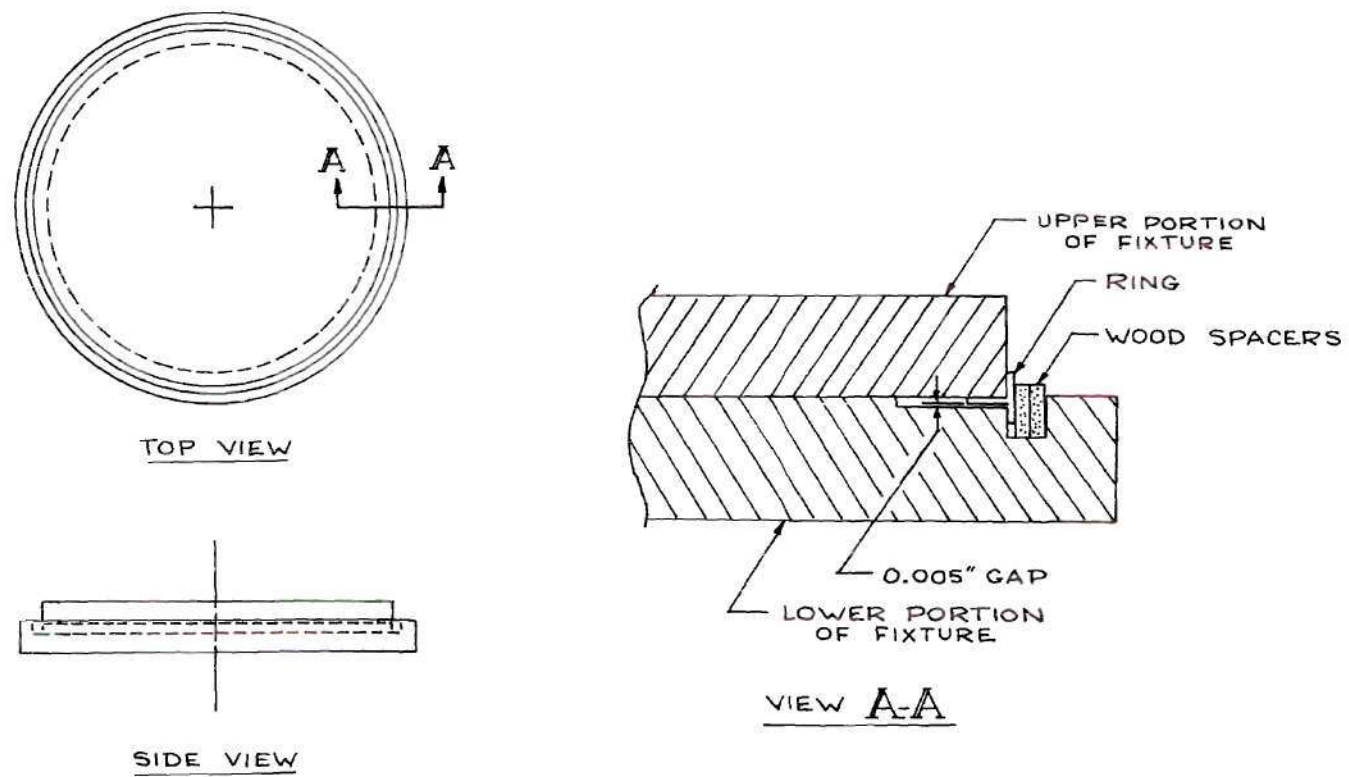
Fixture for Heat Shrinking of "T" Section Rings
